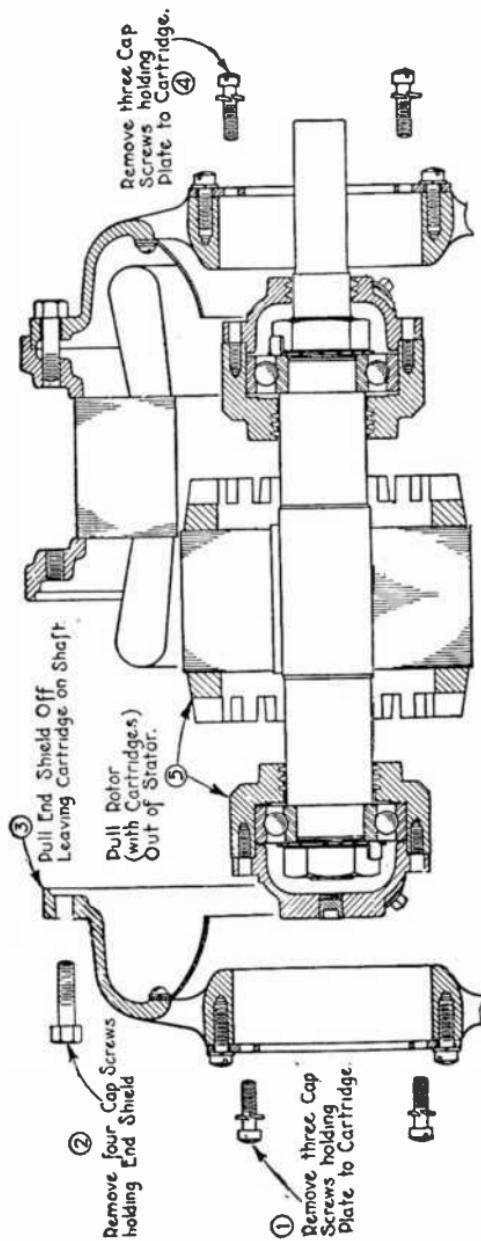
,778.—General Electric d.c. ball bearing elevator motor with cartridge type housing. The construction of the housing for oil lubrication differs somewhat from that employed for grease lubrication. The latter type is here shown.
